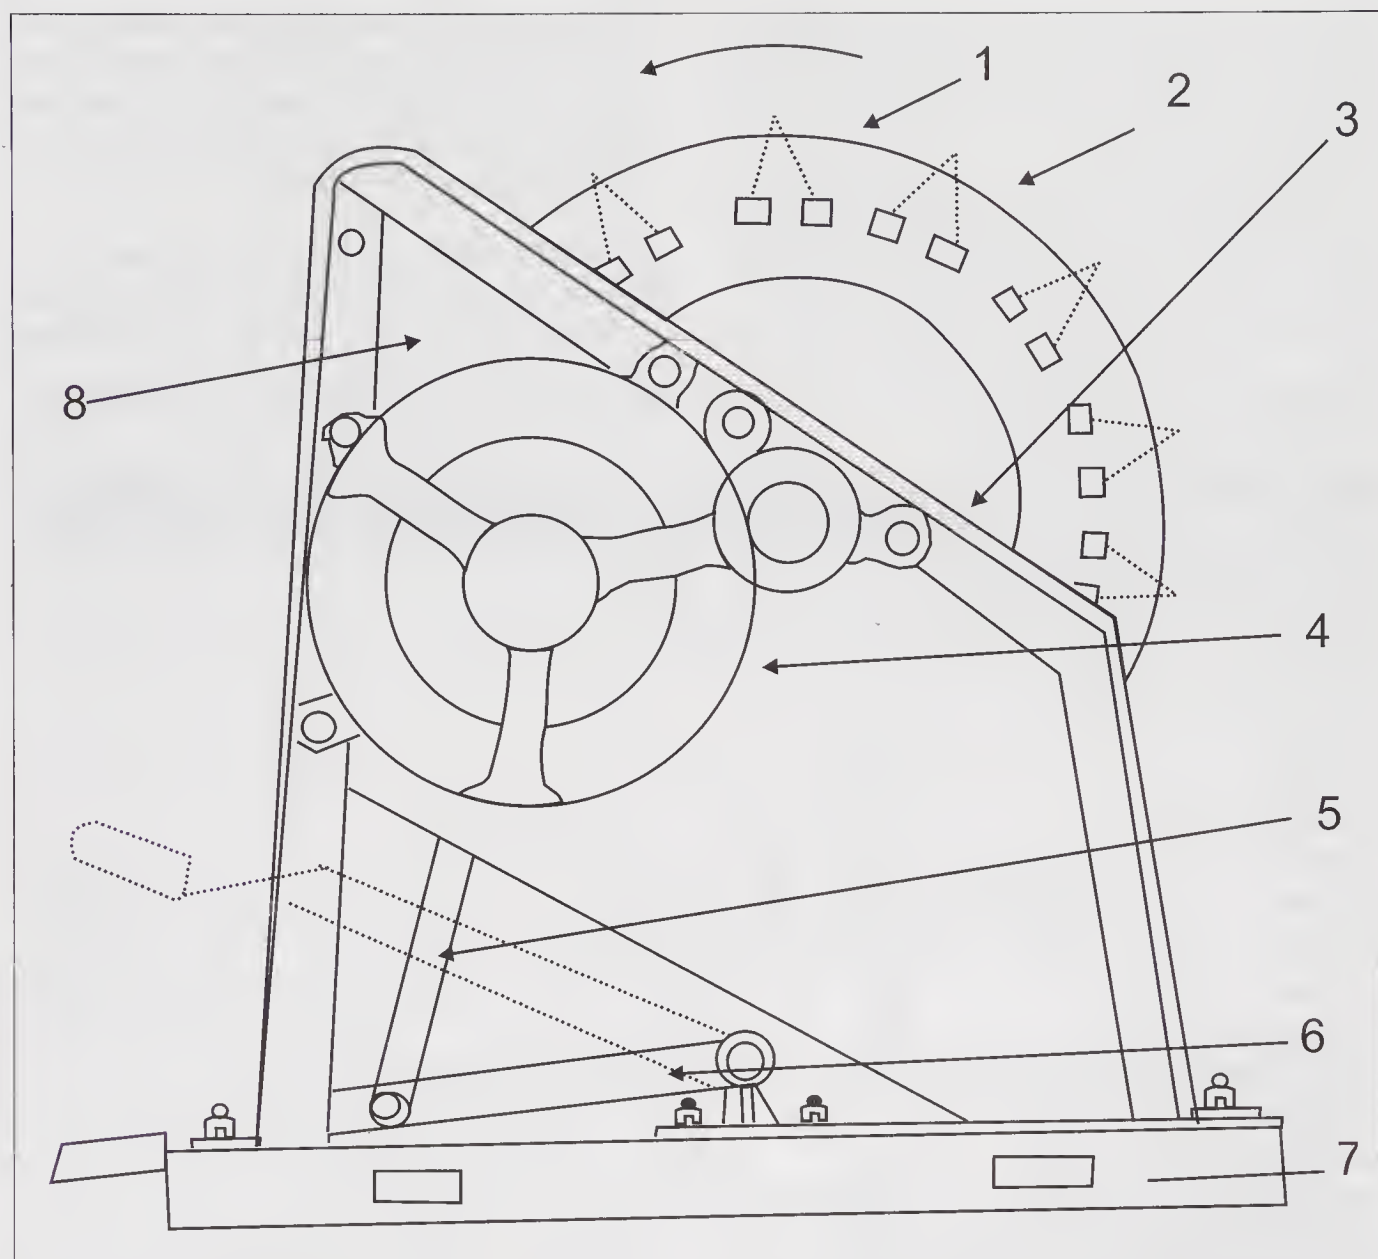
Typical pedal operated thresher for paddy. 1, Threshing drum; 2, Wire loop teeth; 3, Frame; 4, Gear drive casing; 5, Connecting arm; 6, Pedal lever; 7, Base frame; and 8, Side cover sheet.
